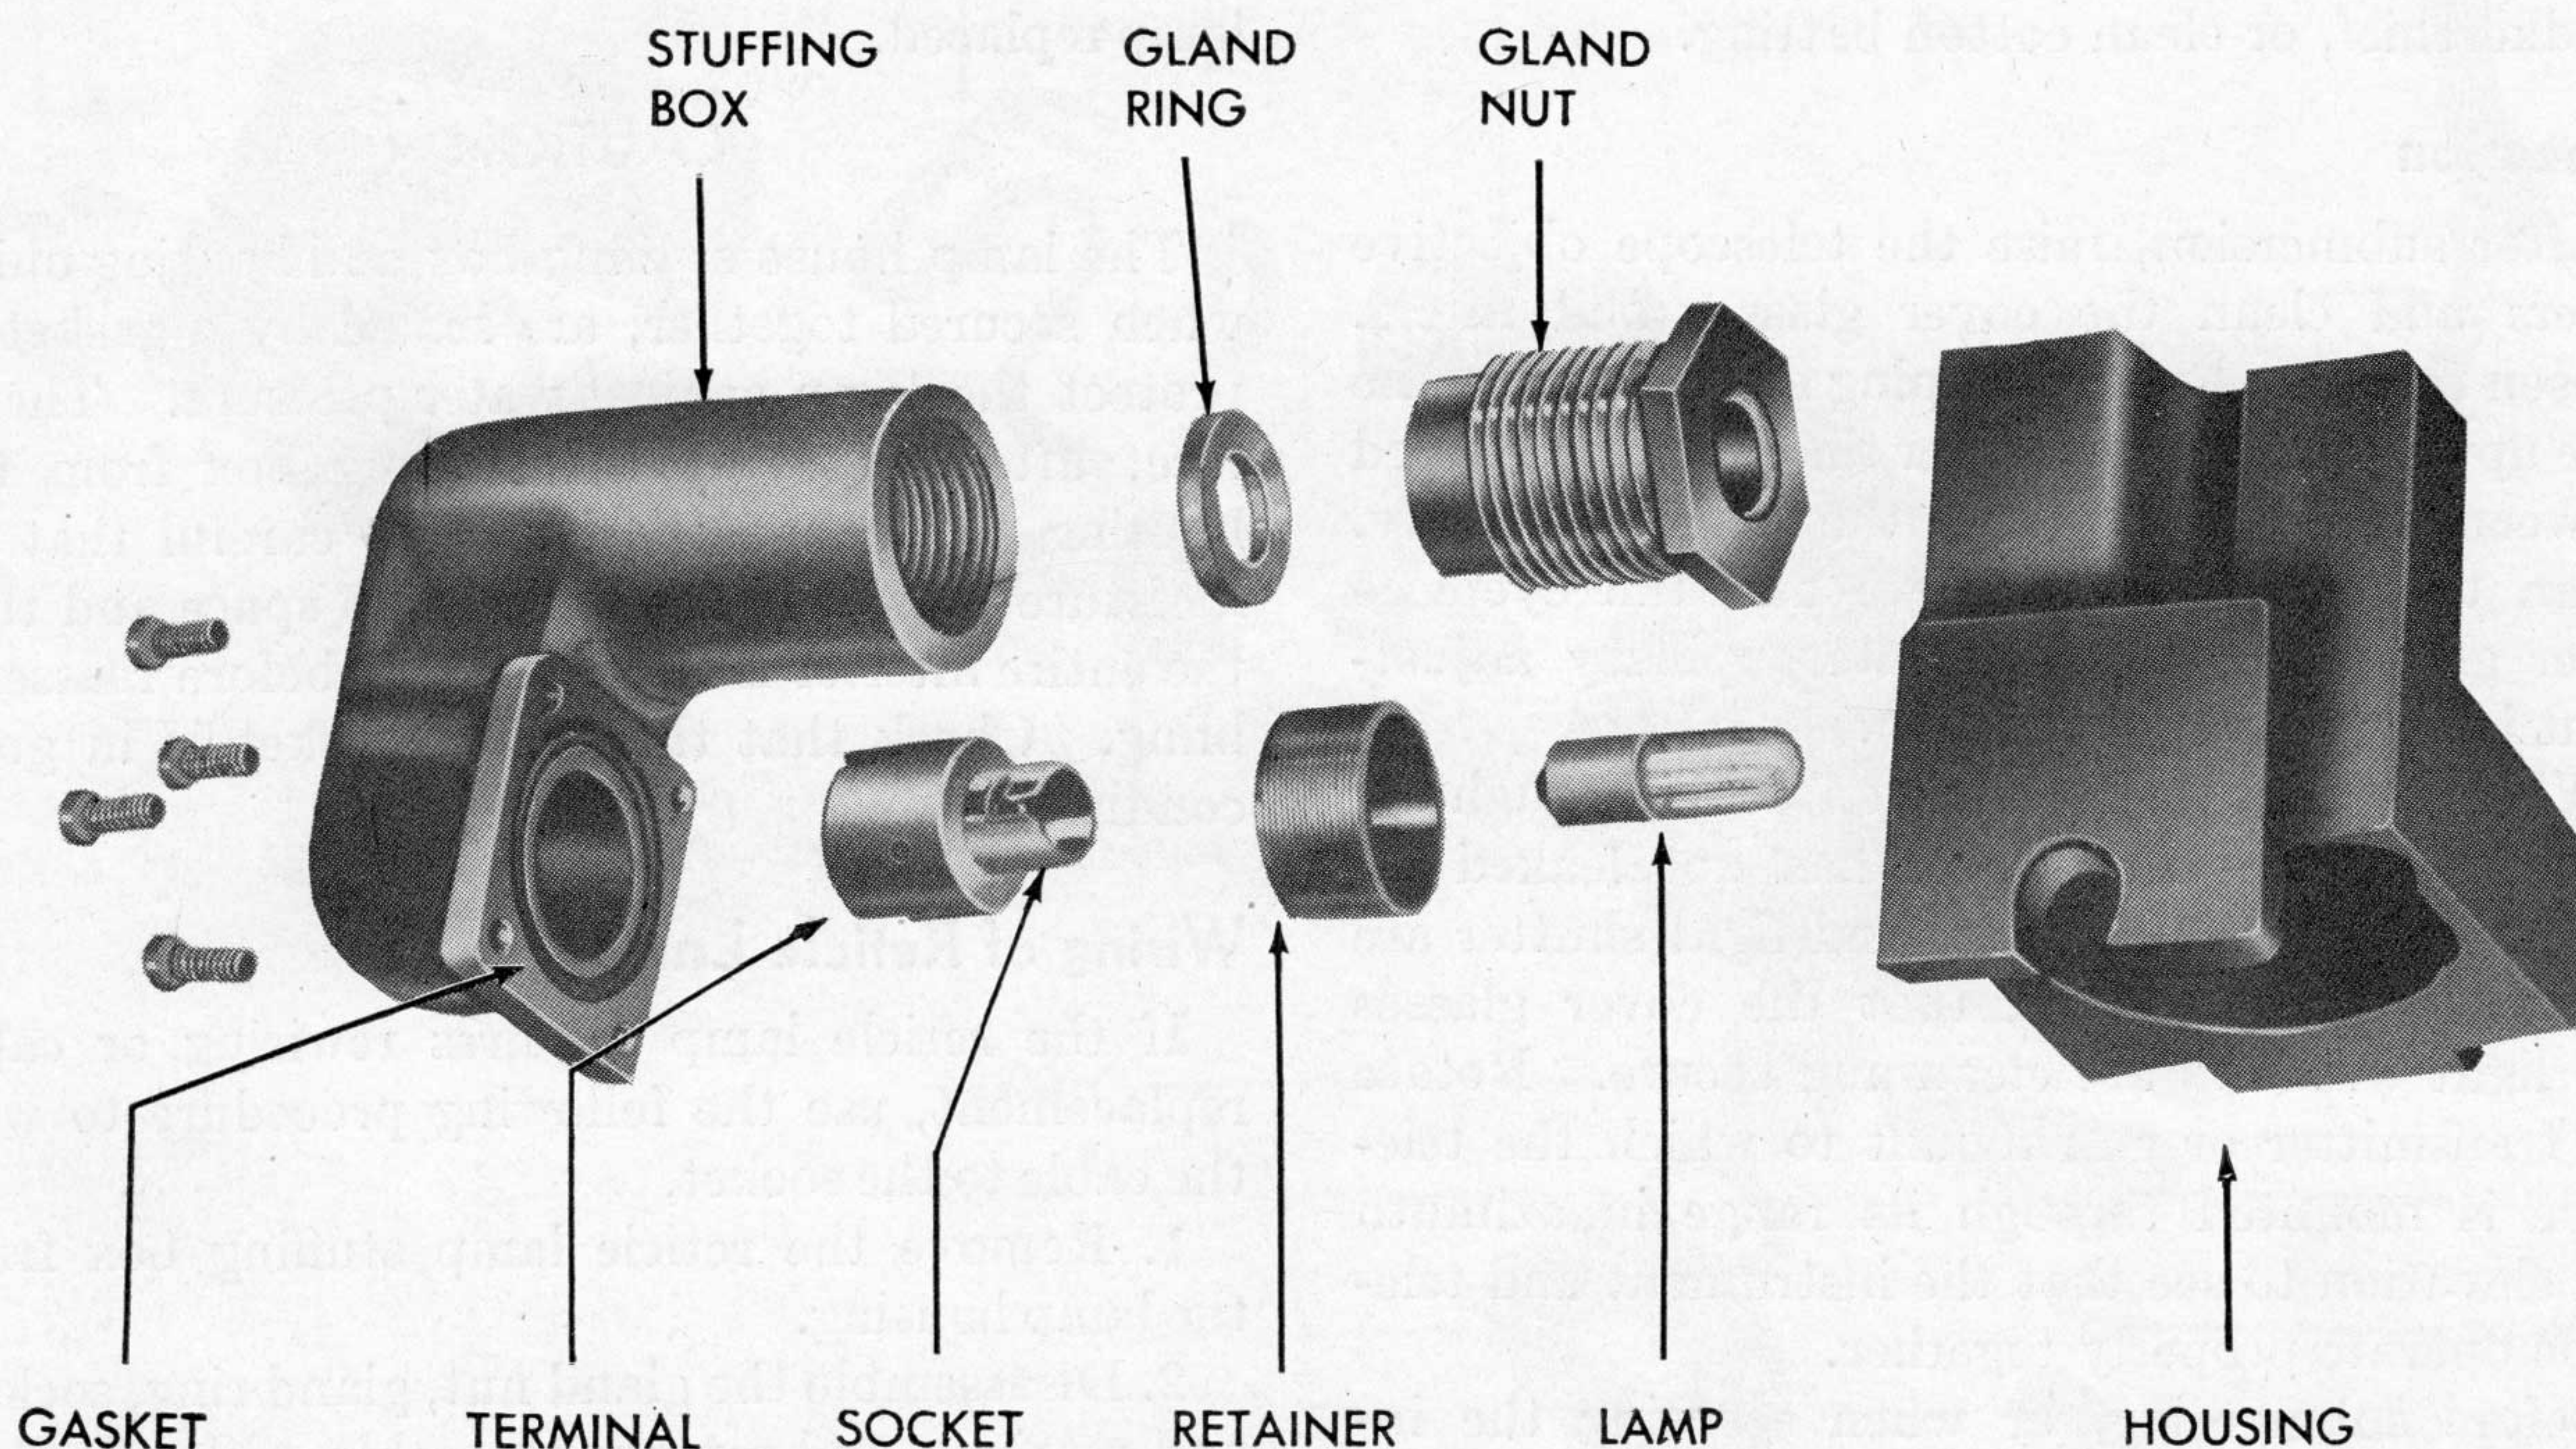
Reticle Lamp, Housing, Socket, and Cable Stuffing Box
